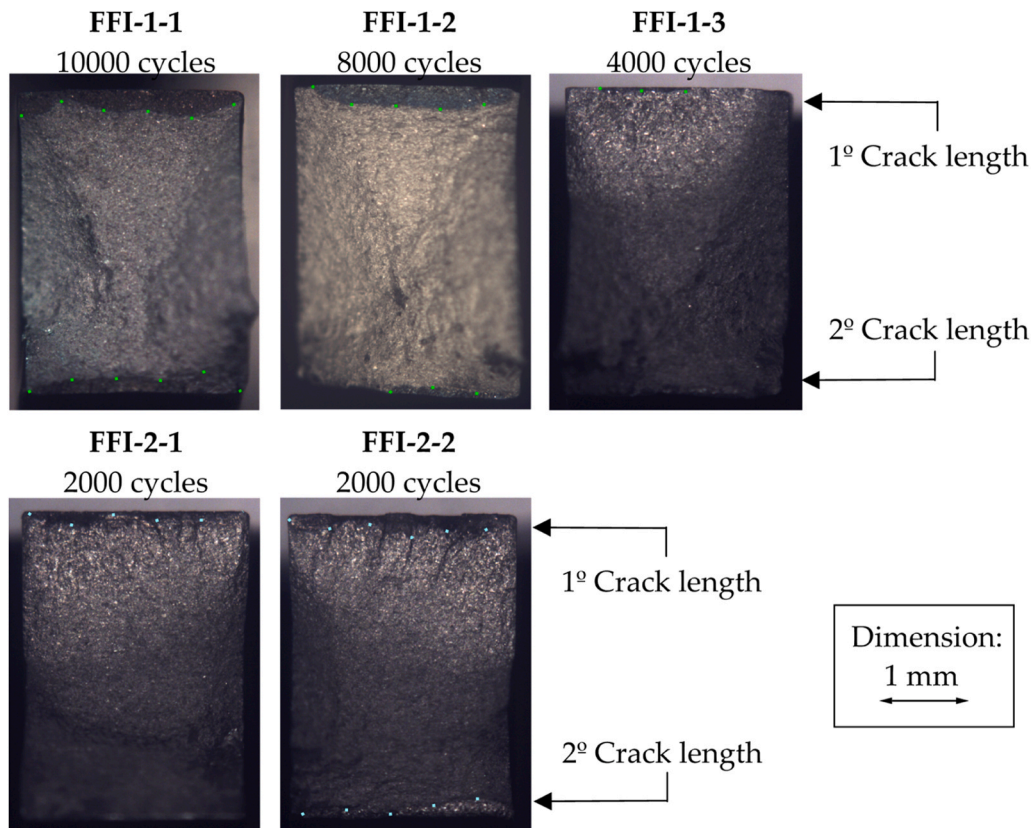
Interrupted fretting fatigue fracture surface - type 1 and 2.
